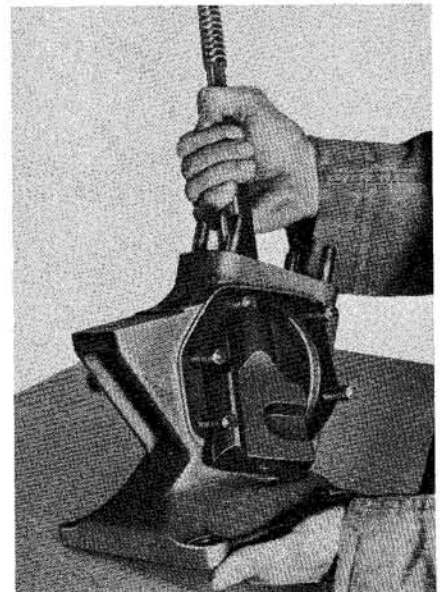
To remove the steering worm shaft from main housing, remove lower stud and withdraw shaft through side opening as shown.
